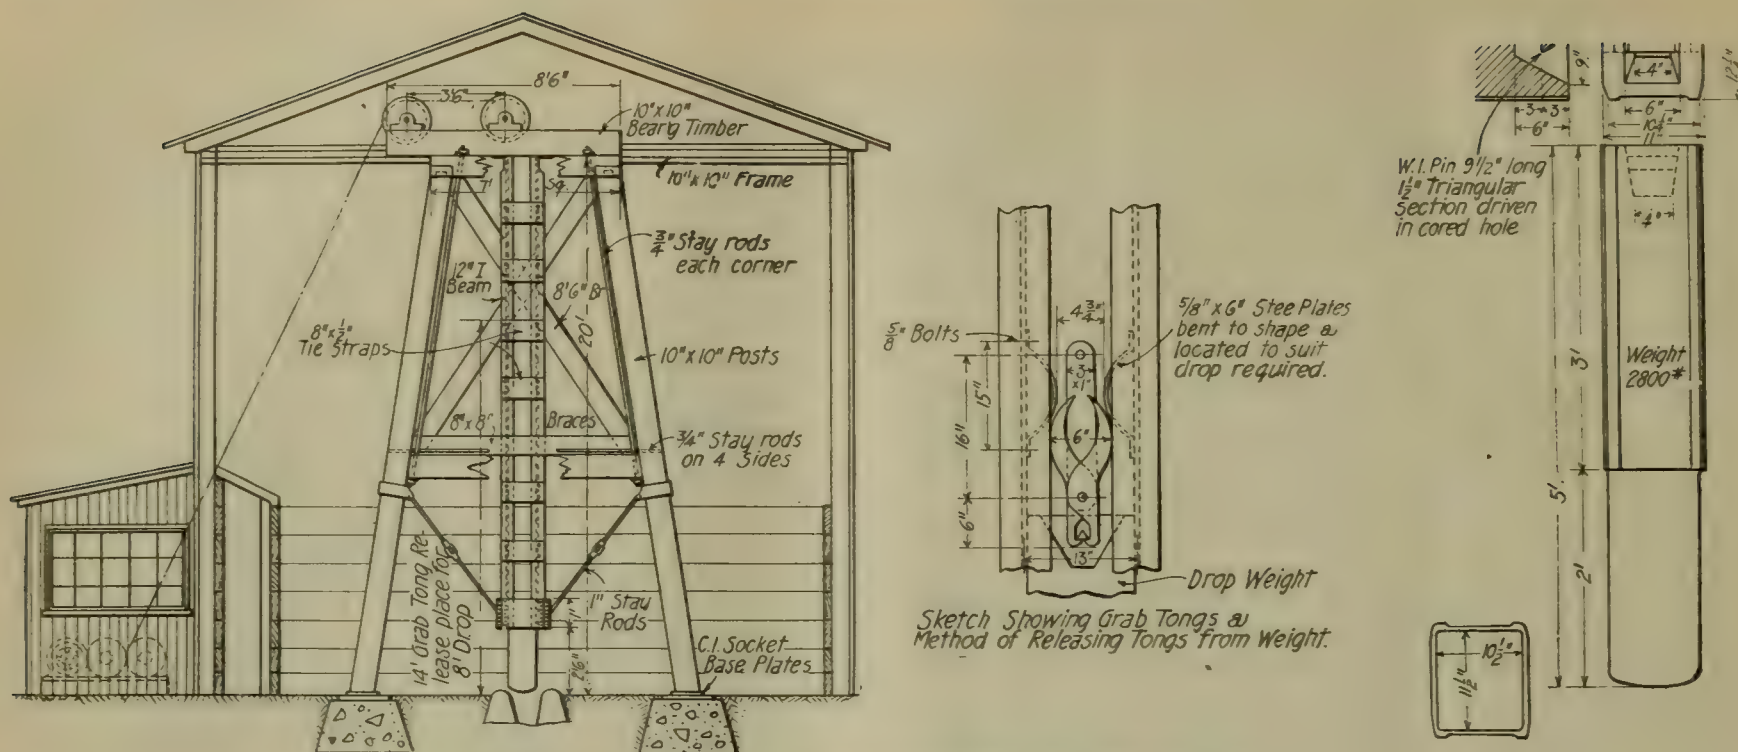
Wheel Testing Machine, Canadian Northern Ry.
